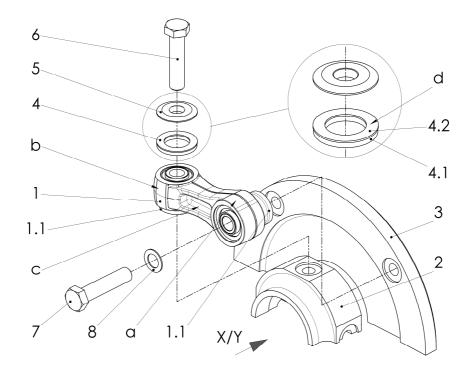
Mounting size 3 and 4 links ("cw" clockwise rotation)
